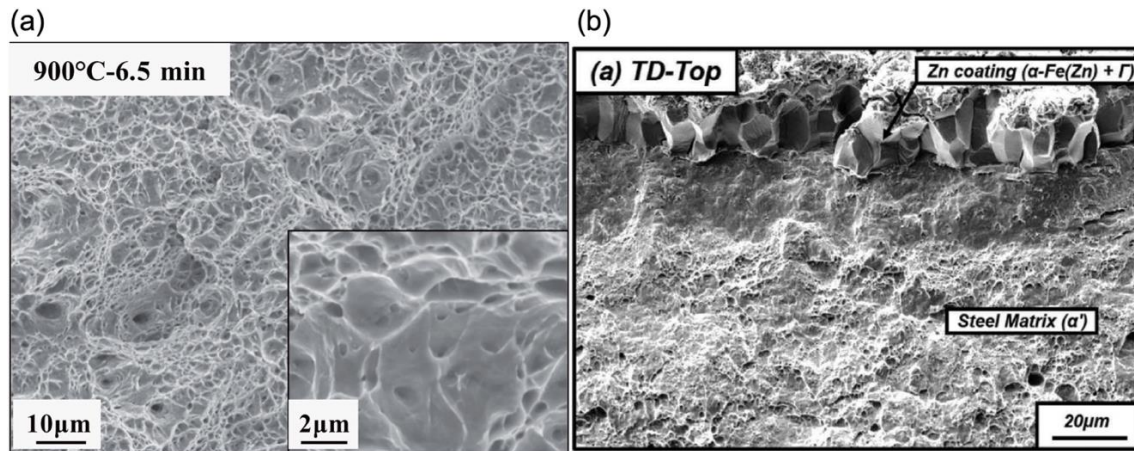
Fracture surfaces at the mid thickness of Al-Si coated press-hardened 22MnB5 (a) [43] and substrate-coating interface of Zn-coated press-hardened 22MnB5 (b) [48].
